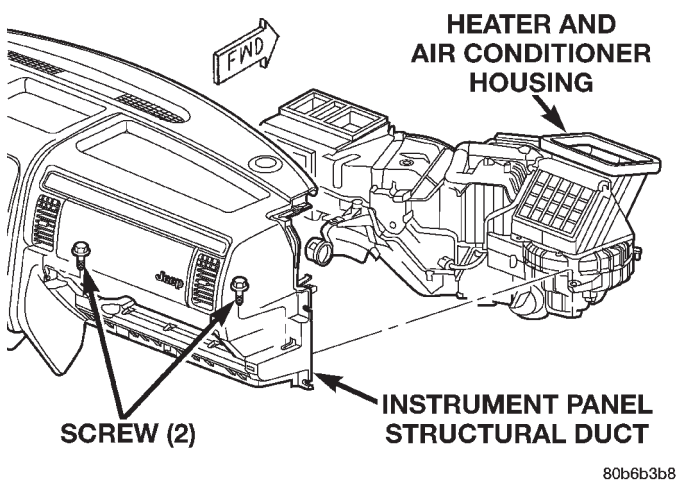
Passenger Side Instrument Panel to Heater/A/C Housing Mounting
